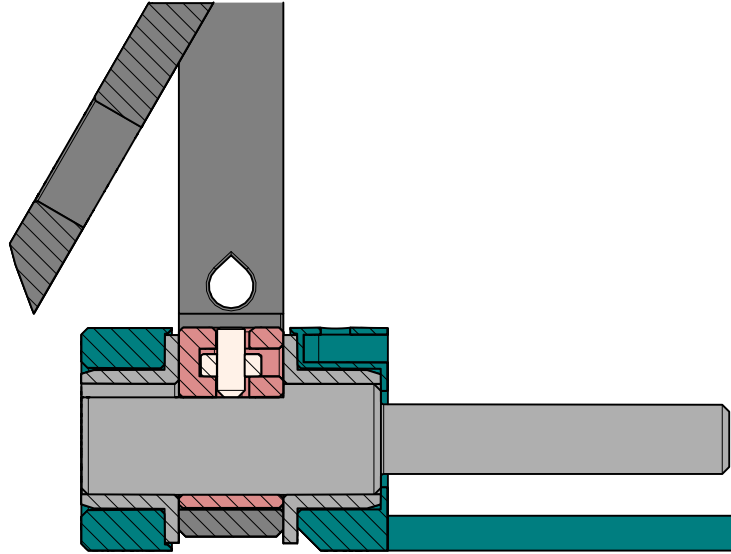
Side (sagittal plane) sectional view of the shaft assembly.
